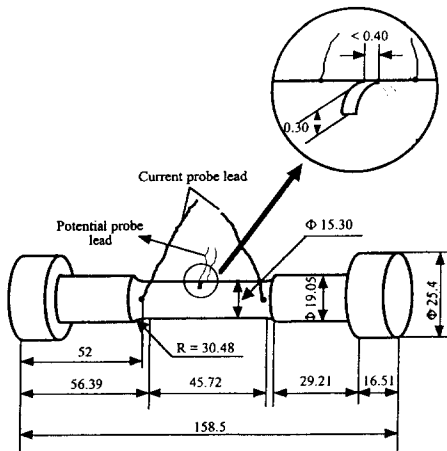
Geometry of surface notched cylindrical specimen (unit : mm)
